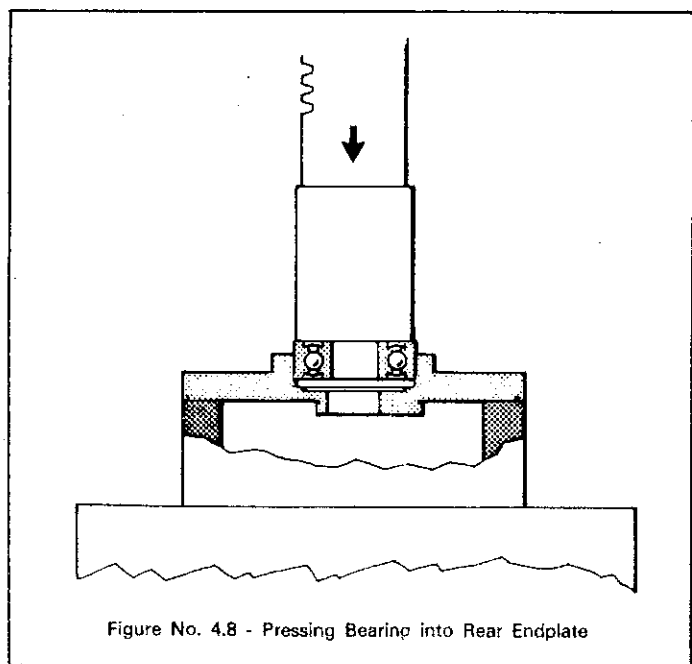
Pressing Bearing into Rear Endplate
